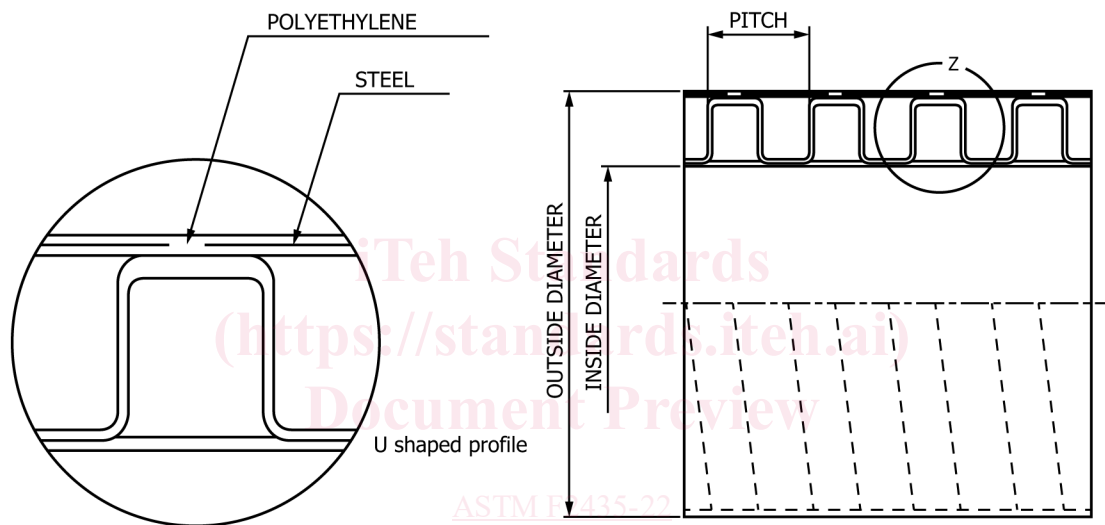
Triple-Wall Steel Reinforced Corrugated Polyethylene Pipe – Type IIB
